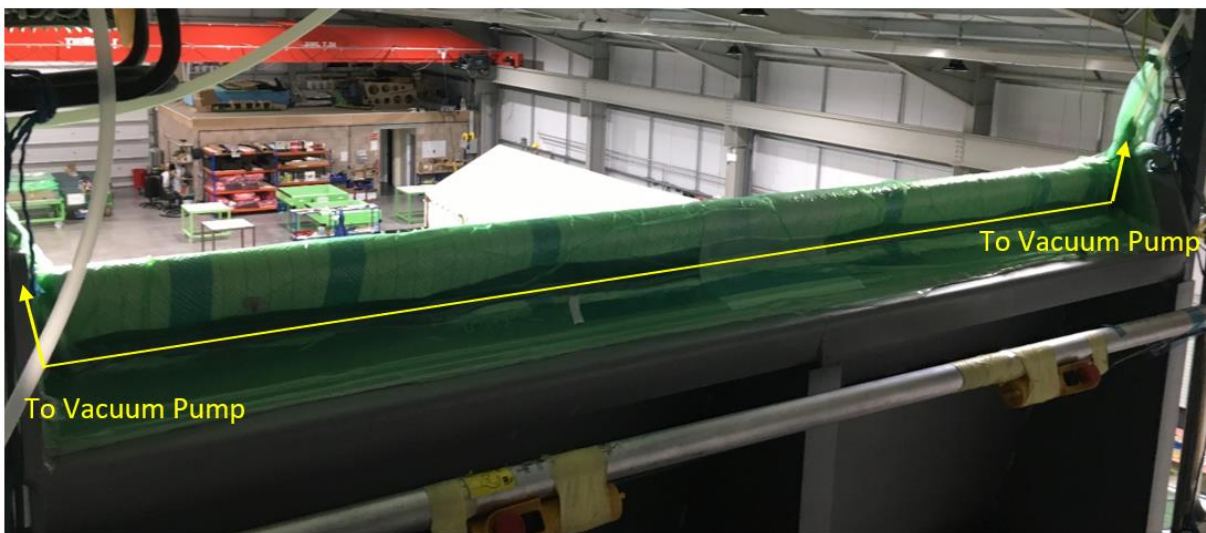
Vacuum outlet (highlighted in yellow) at top of demonstrator, on back side of tool surface
